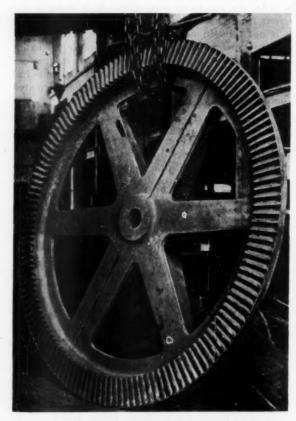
A bevel gear made in S.G. iron—diameter 12 ft, weight 3500 lb.
